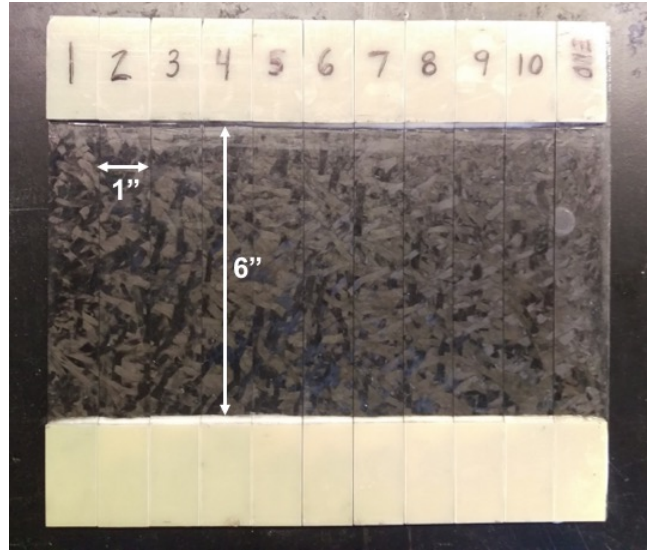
Example of 300-by-300mm molded flat plaque with tensile specimens cut 25.4-by-254.0mm and tabbed for tensile testing.
